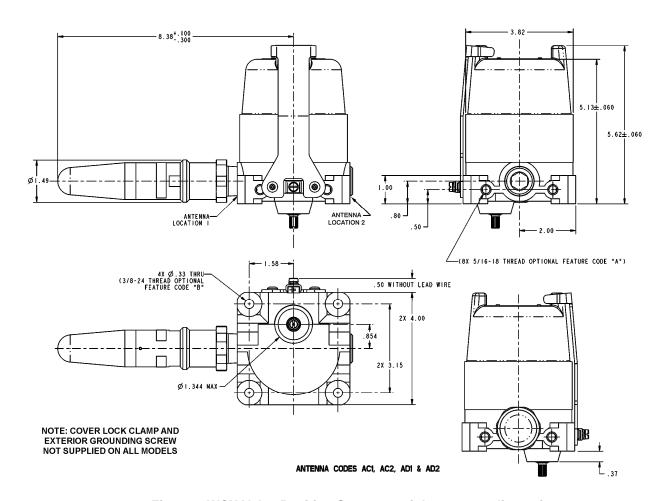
WCX Valve Position Sensor straight antenna dimensions
